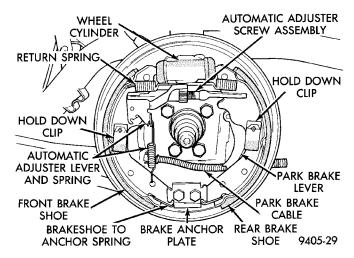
Kelsey Hayes Rear Wheel Brake Assembly (Left Side Shown)
